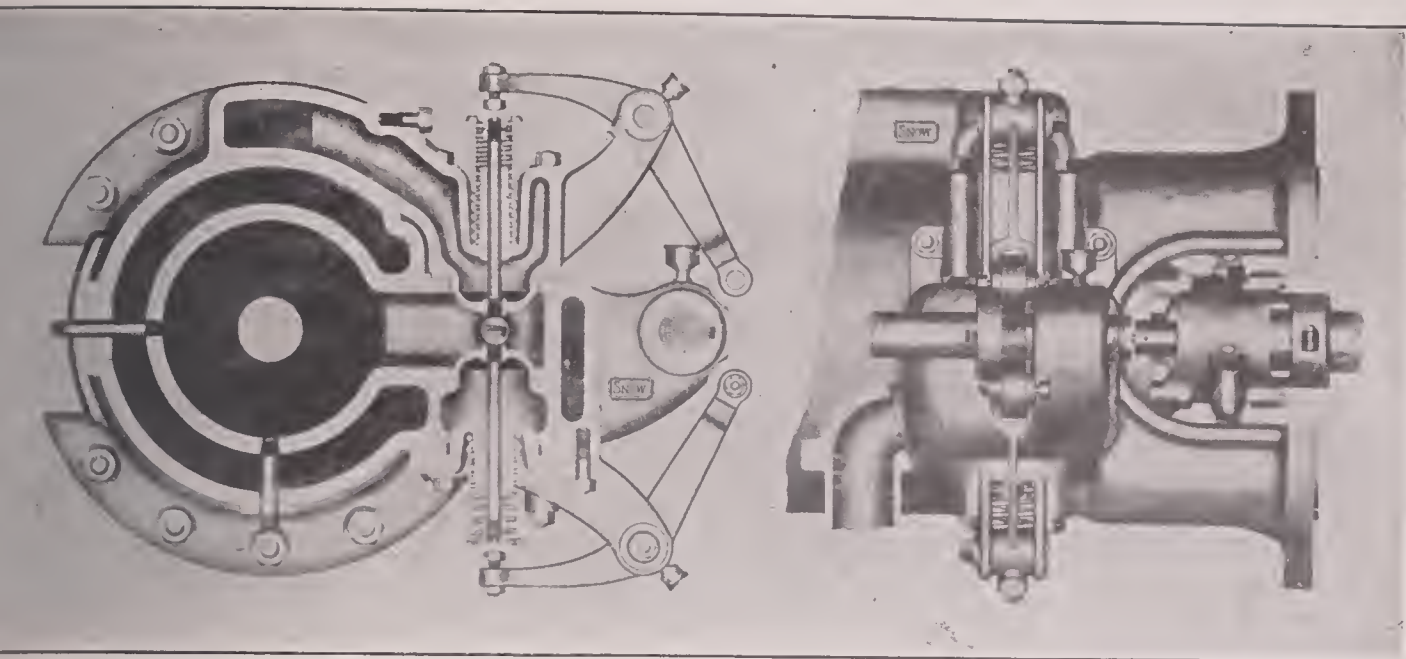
Valve Gear, Smaller Sizes of Type B Snow Engines.
